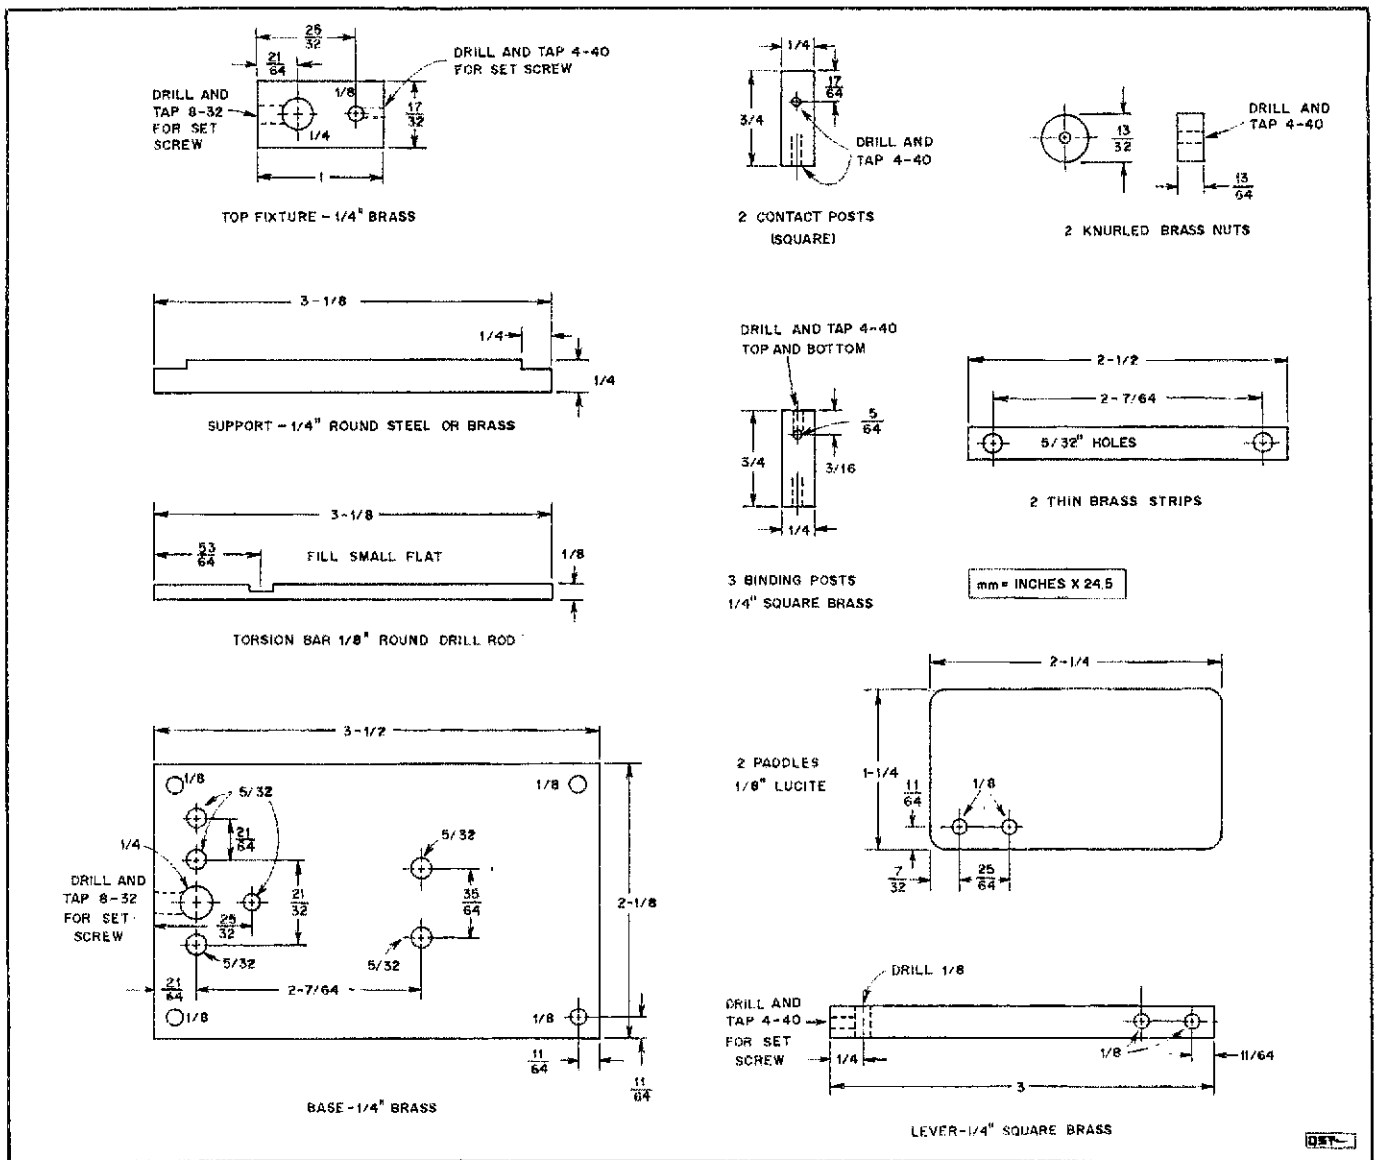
Parts for the Torsion Bar Key. Dimensions given are in inches (mm = inches × 25.4).
